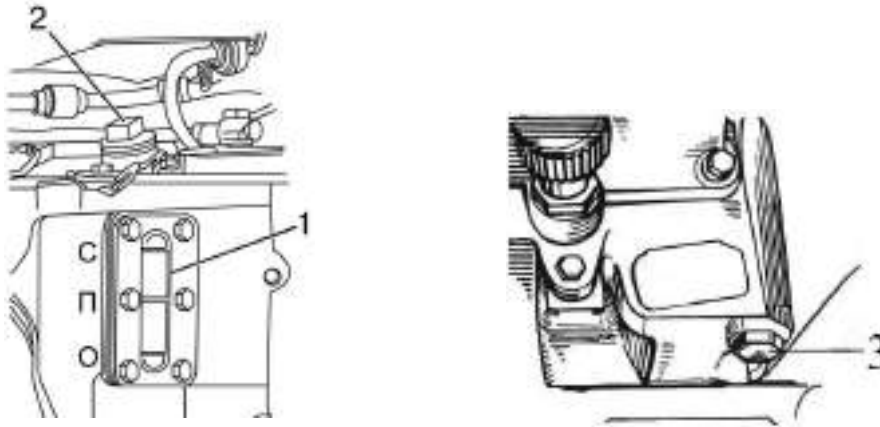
Change oil level in HSU tank on BELARUS-1021.3 tractor
